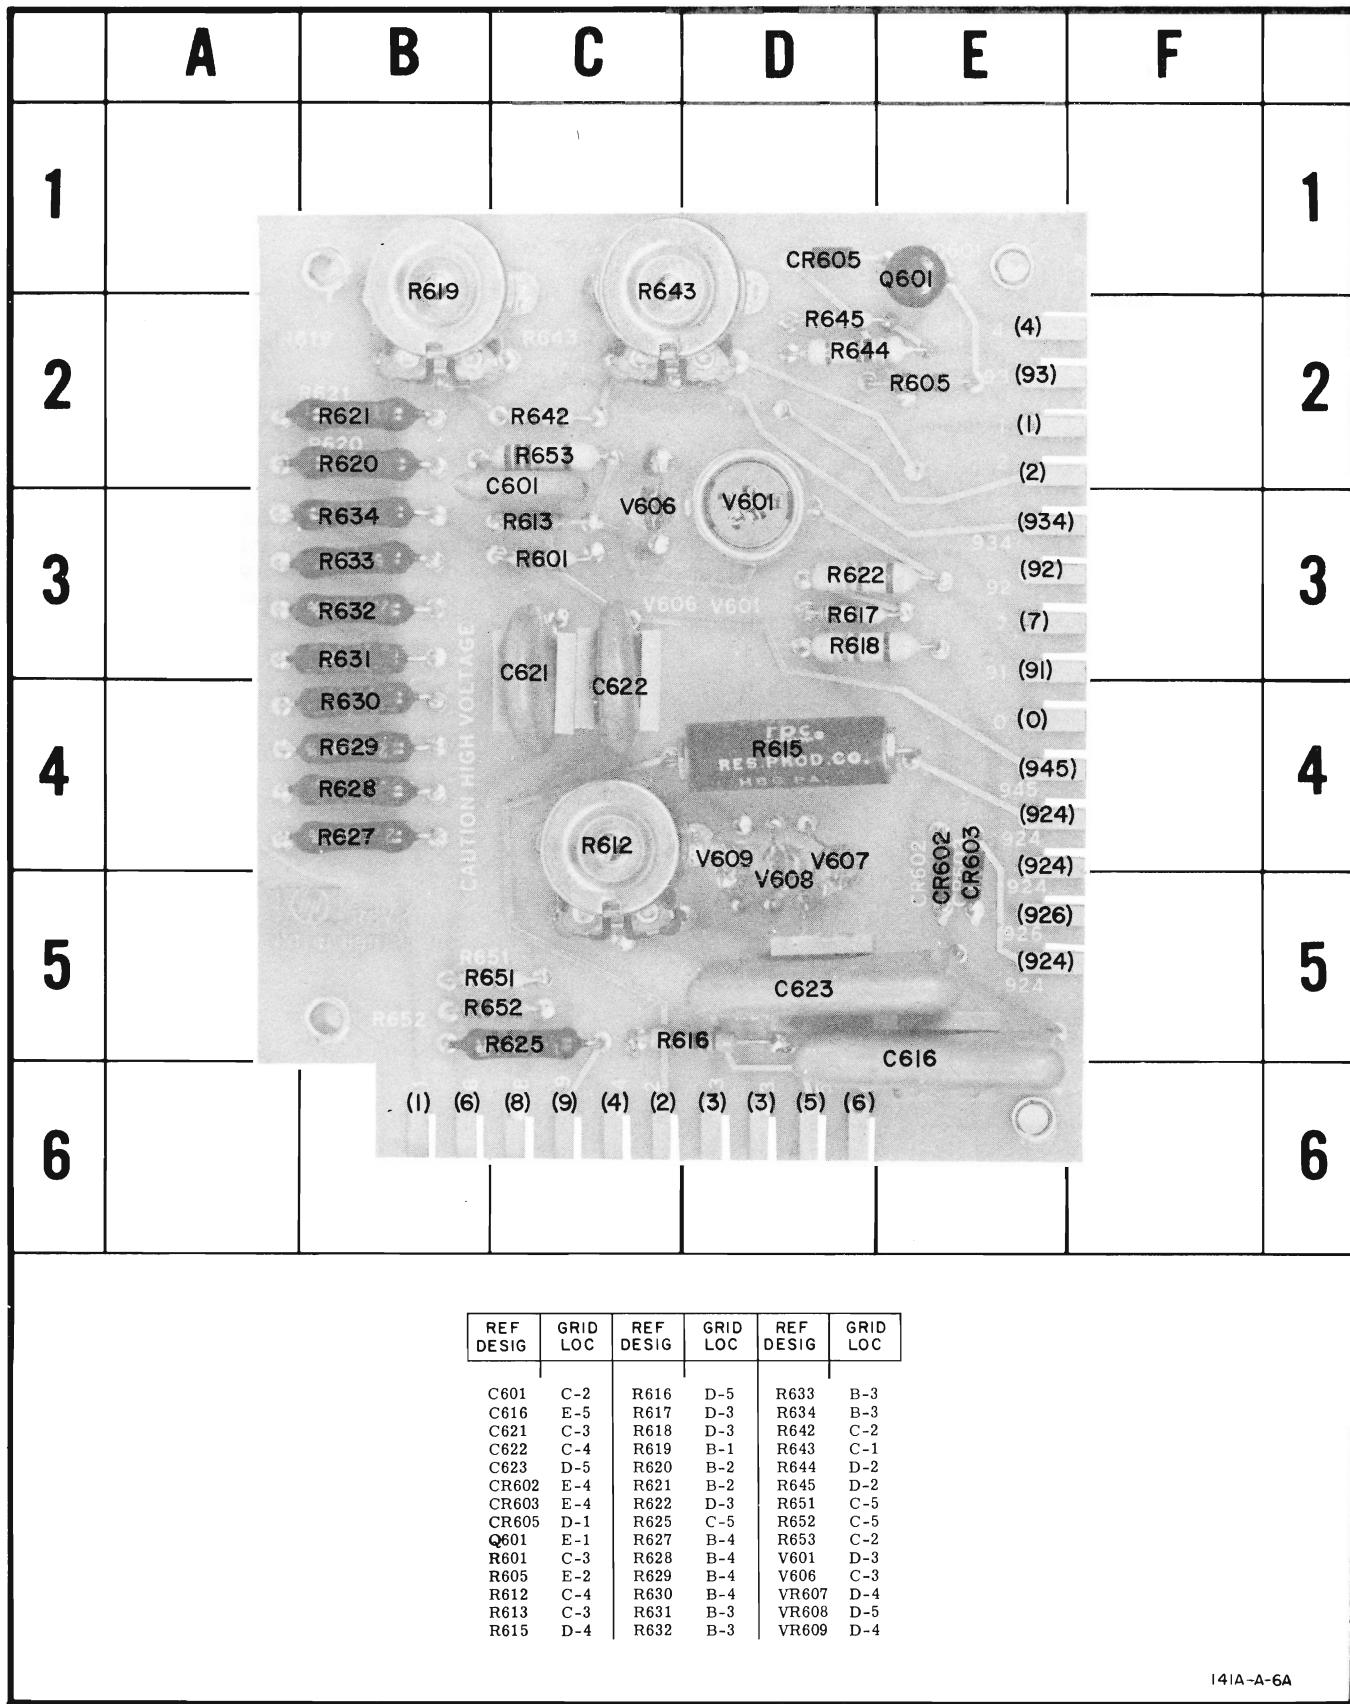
Component Identification, High-Voltage Regulator Board A602
